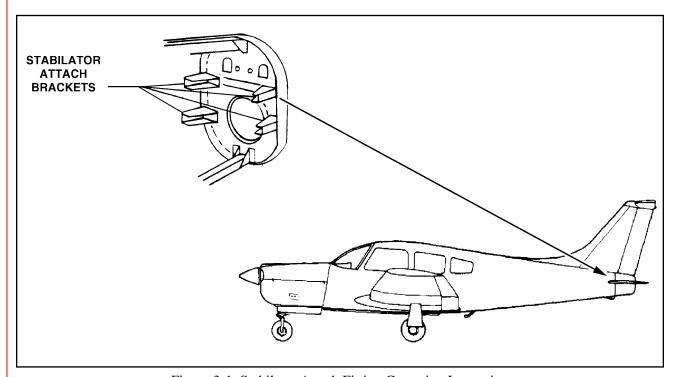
Stabilator Attach Fitting Corrosion Inspection
